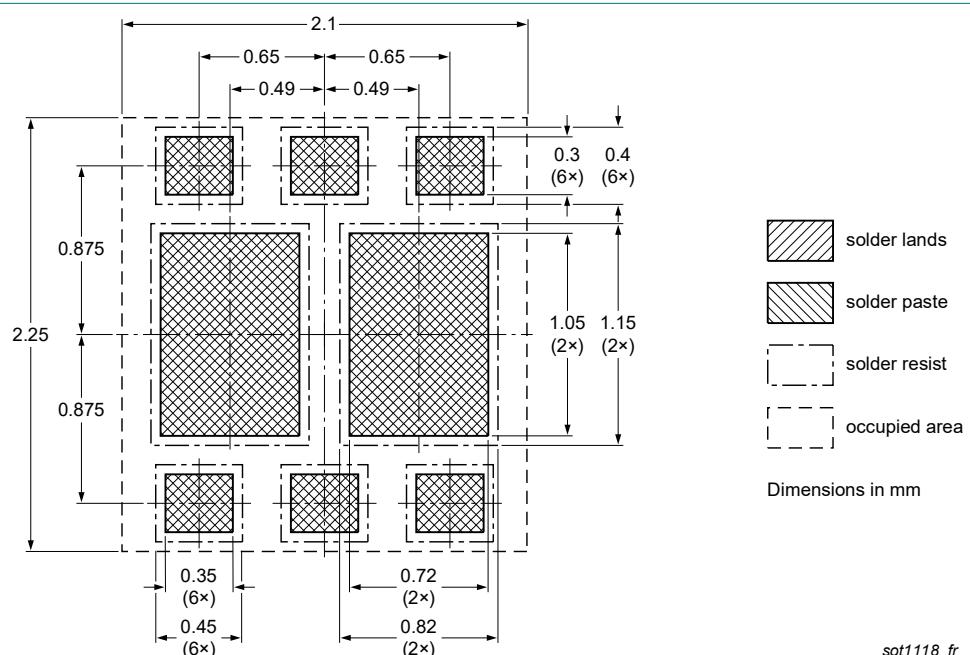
Reflow soldering footprint for DFN2020-6 (SOT1118)
